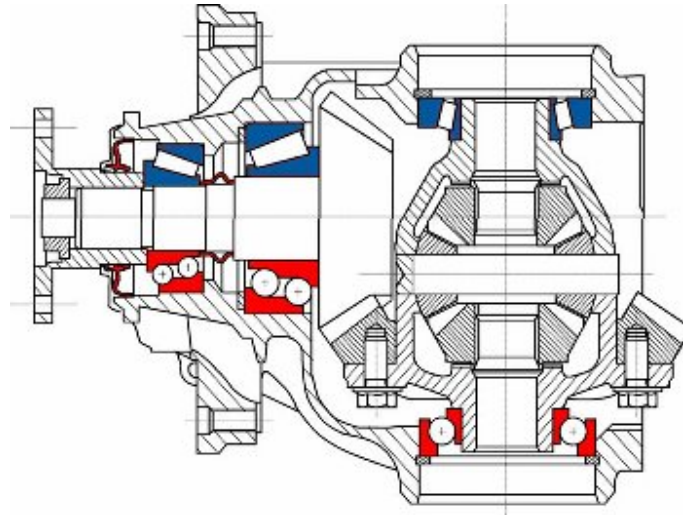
Schematic comparison of tapered-roller bearings (blue) and angular contact ball bearings (red) when mounted on a differential [7]
